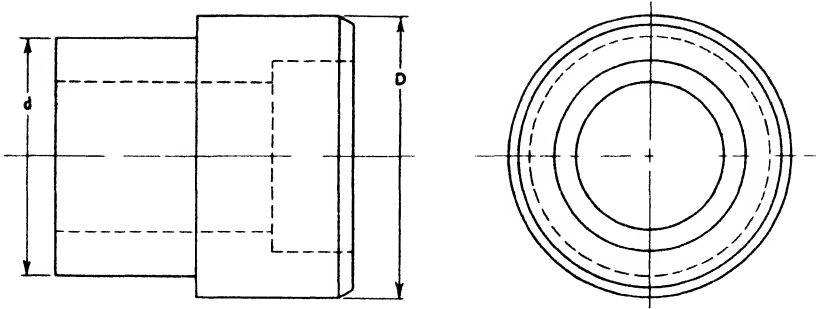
A Typical Workpiece Such As Would Be Shaped by a Forming Tool
